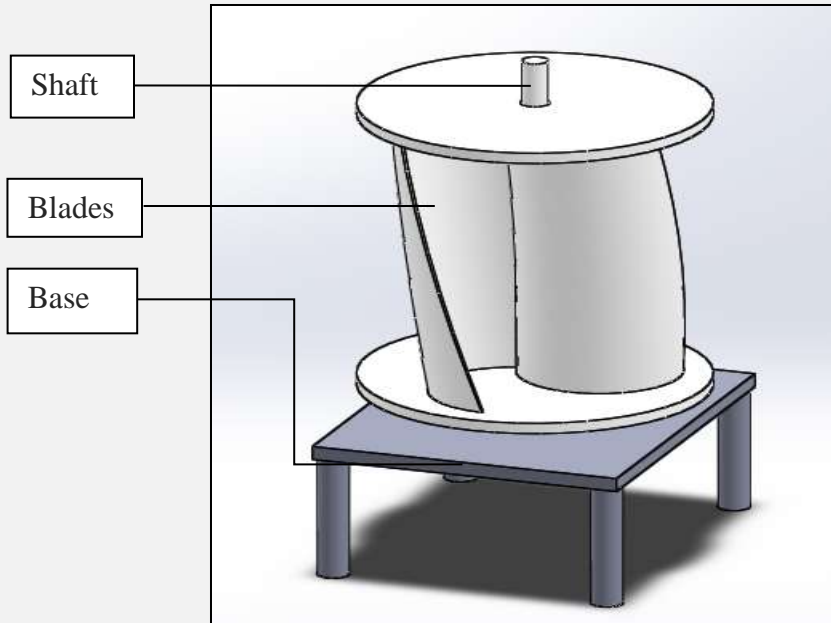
Solidworks model of the Proposed Miniature VAWT (Assembly drawing).
